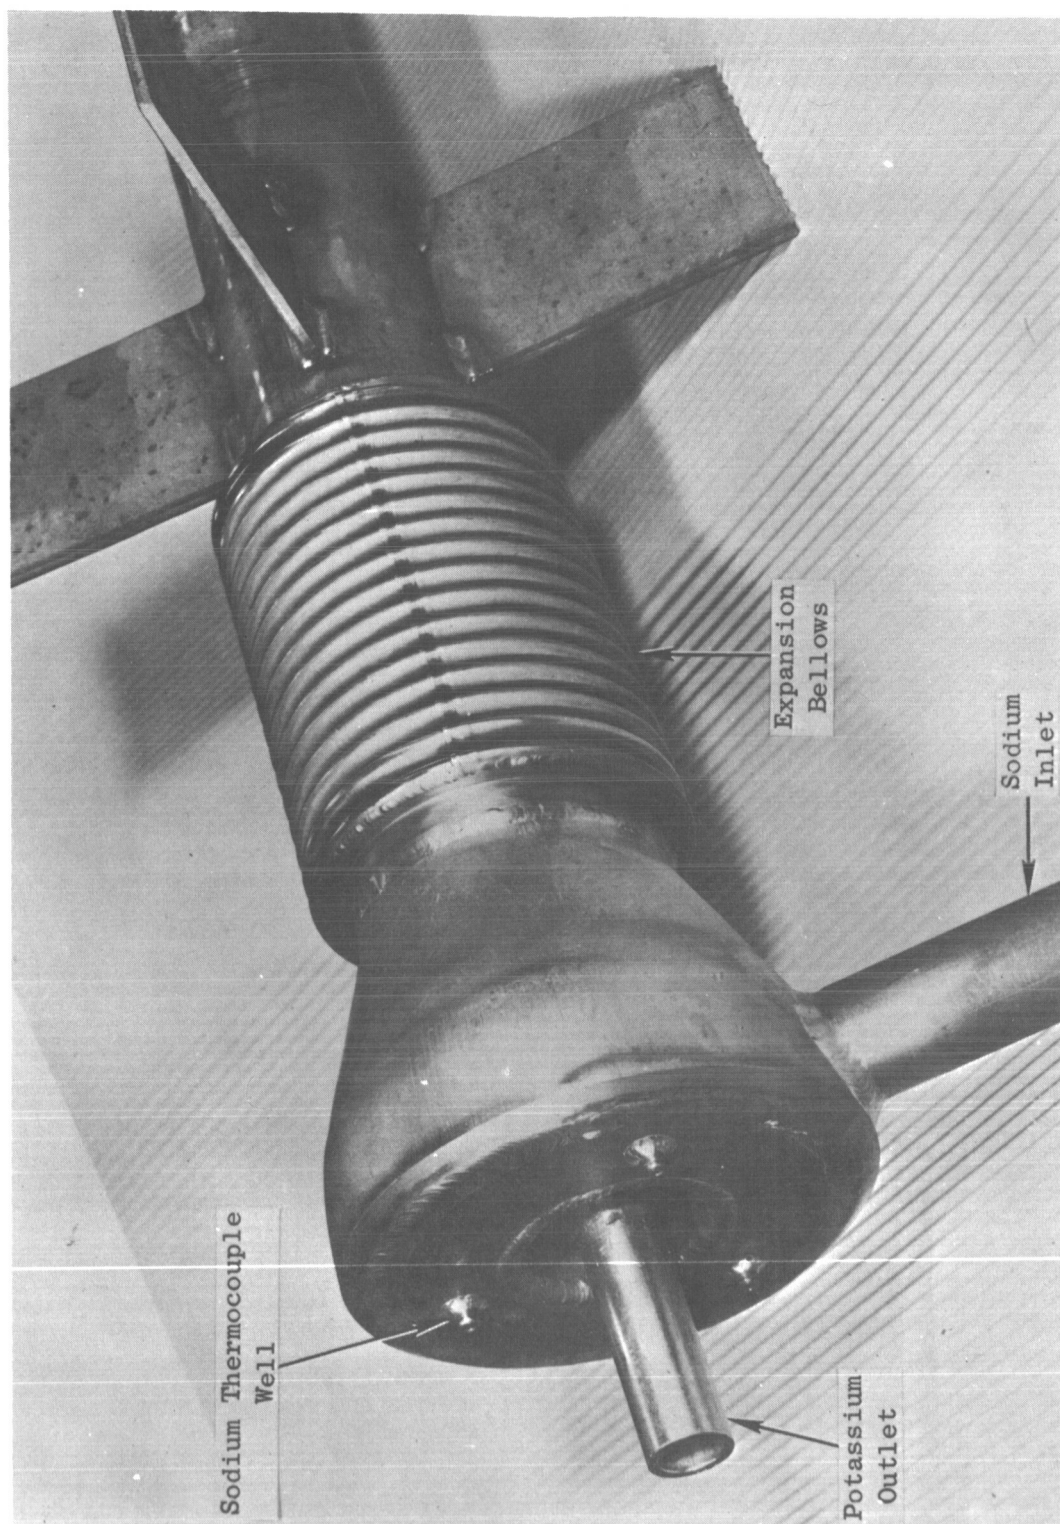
End View of Test Condenser Shell Showing Sodium Inlet Thermocouple Wells
